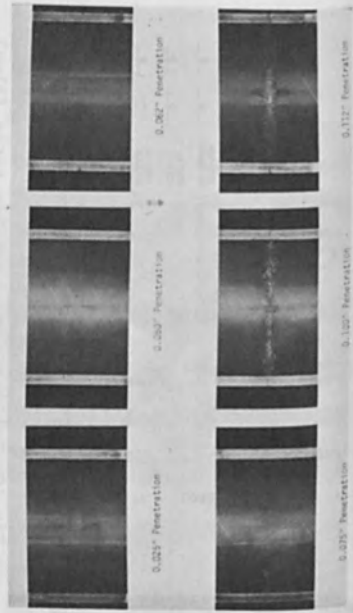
E.B. welding effects on dielectric liner (B.O.P. welds).
